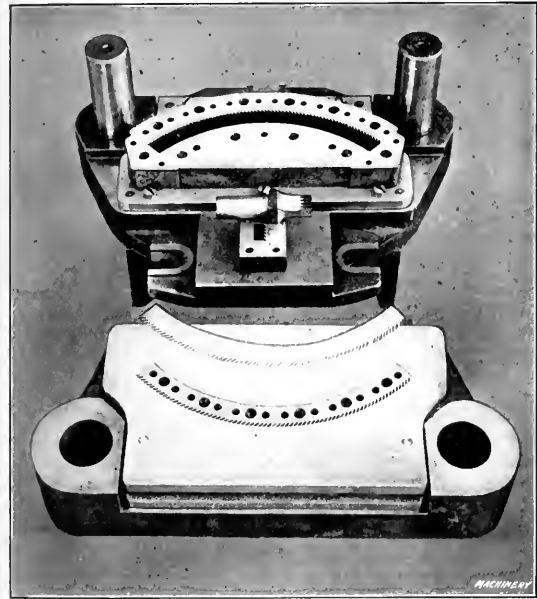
Punch and Die and Trial Tools for making Blank in Fig. 2
